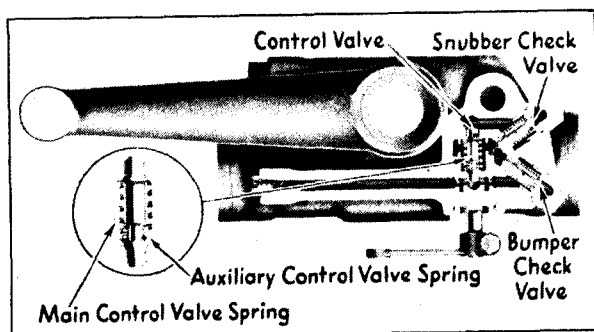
Sectional view of 370-C and 452-C shock absorber showing the auxiliary spring on the control valve
